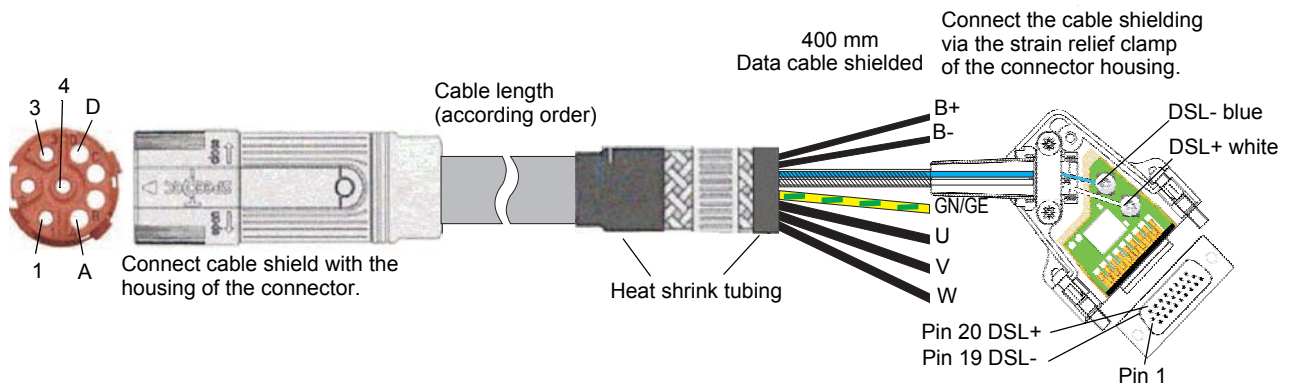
Motor cable with HIPERFACE DSL[™] 20 A
